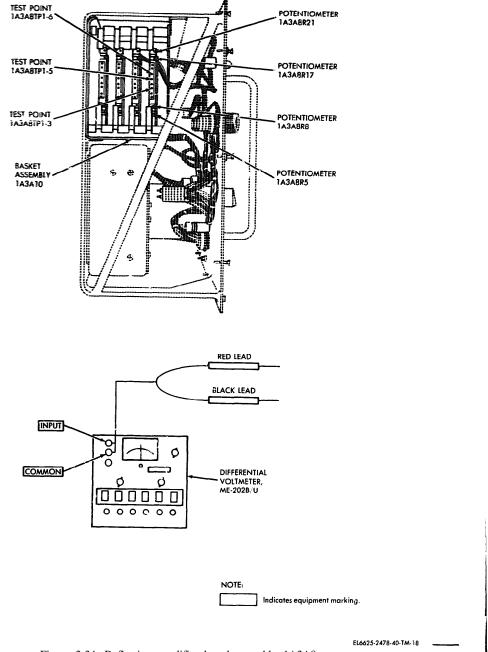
Deflection amplifier board assembly 1A3A8, adjustment and test points.
